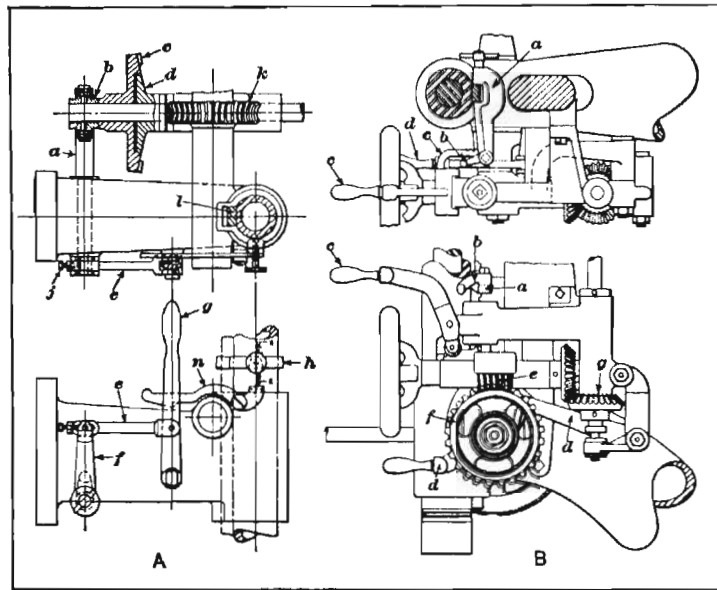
Automatic Stop or Tripping Mechanisms of Vertical-spindle Drilling Machines
